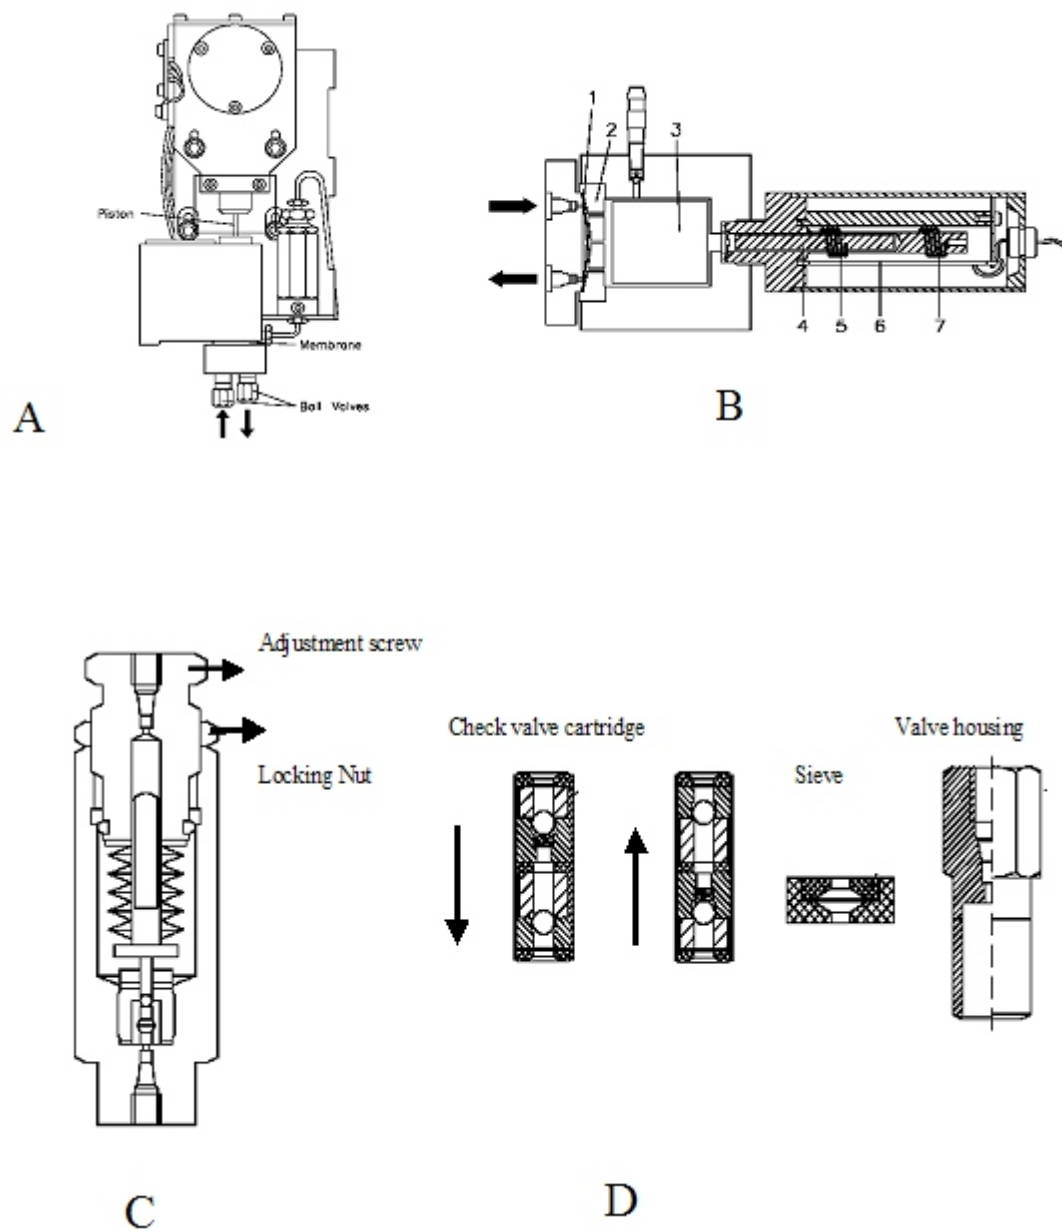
A) High pressure pump; B) High pressure damper parts.(1) membrane, (2) protection plate(3) steel block (4)steel rod (5)sample winding (6) transducer board (7) reference winding; C) override valve; D)solvent ball valves.
